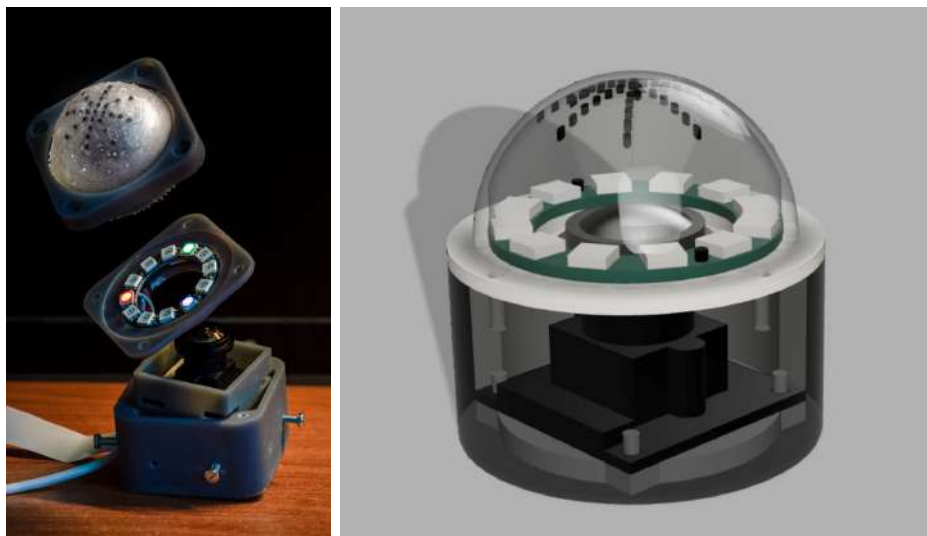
On the left a photograph of an exploded view of the initial prototype; on the right a render of the prototype.
